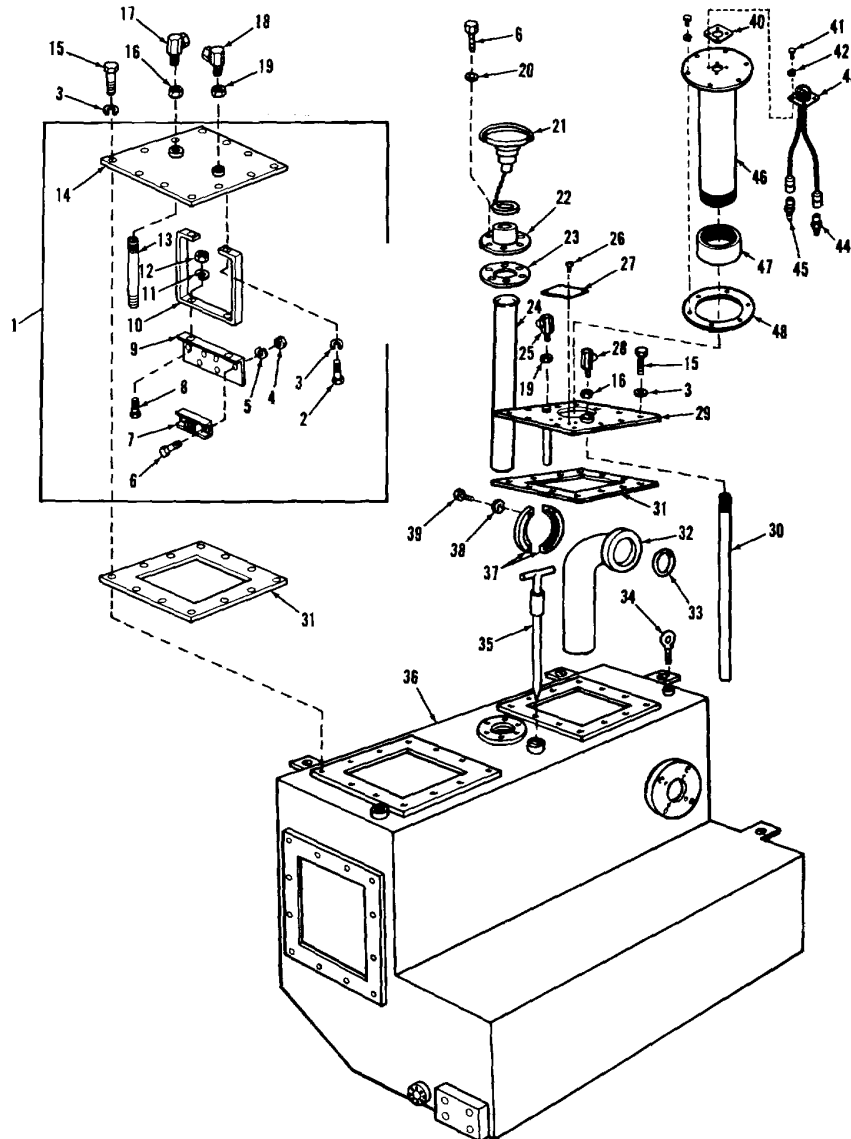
Front cover assembly and attaching parts - hydraulic oil tank.
